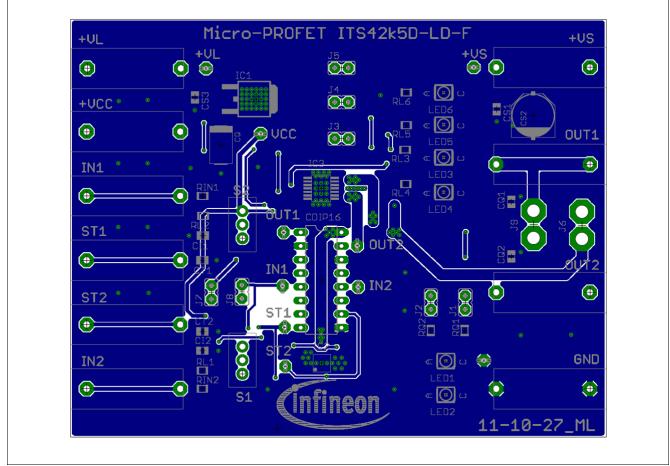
Bottom Layer of ITS42k5D-LD-F Demo board (PG-TSON-10)
